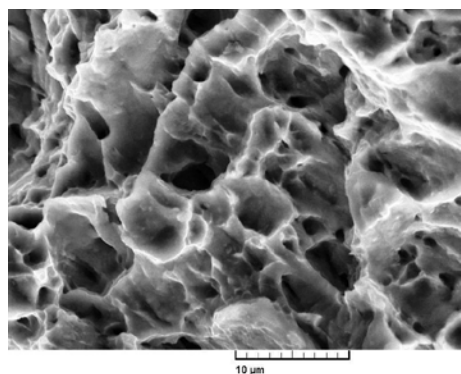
SEM FRACTOGRAPH FOR TUBE 3
